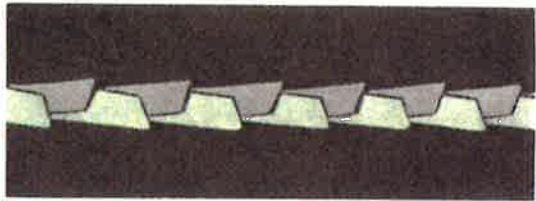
Cutting edges of crosscut-saw teeth.
